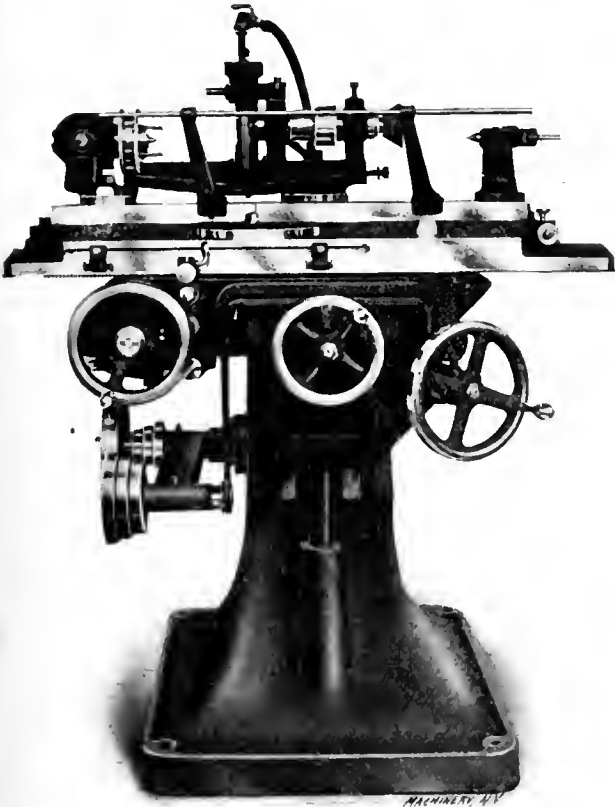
Front View of the Oesterlein Universal Grinding Machine, showing Protection of Sliding Bearings from Emery Dust.
